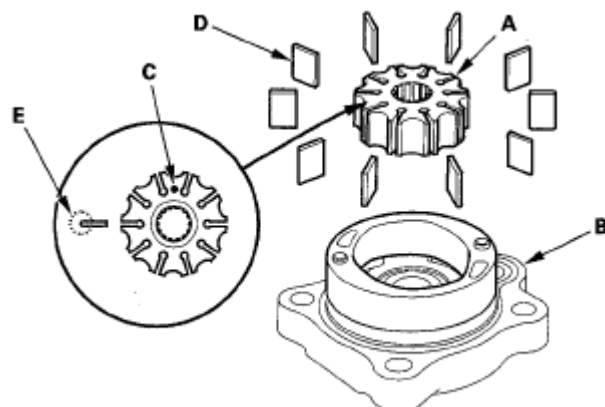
Identifying Pump Cover And Rotor With Vanes
